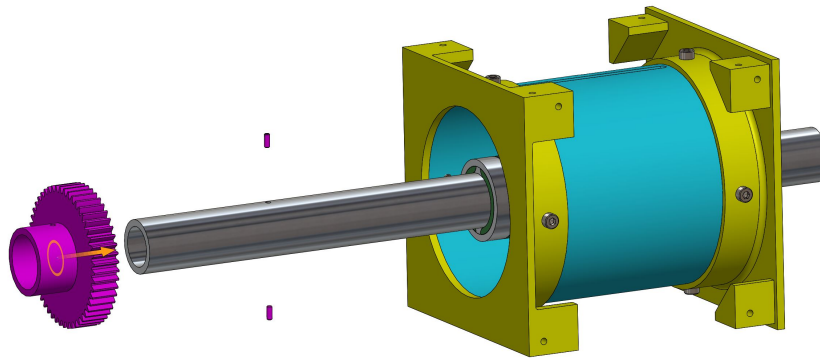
Attach the largest gear to the long main shaft with two set screws.
